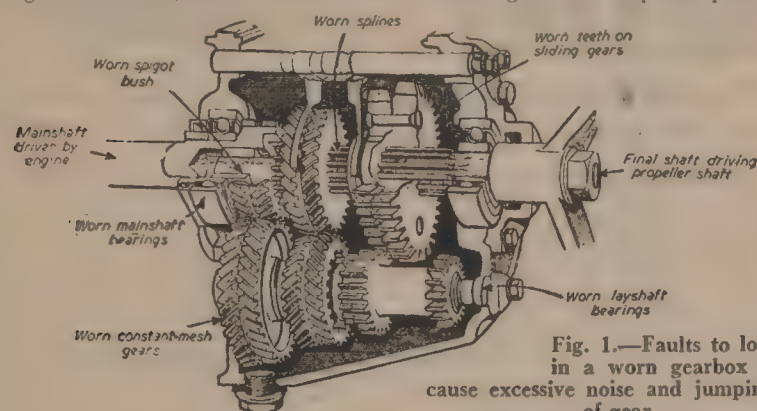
Faults to look for in a worn gearbox which cause excessive noise and jumping out of gear.
